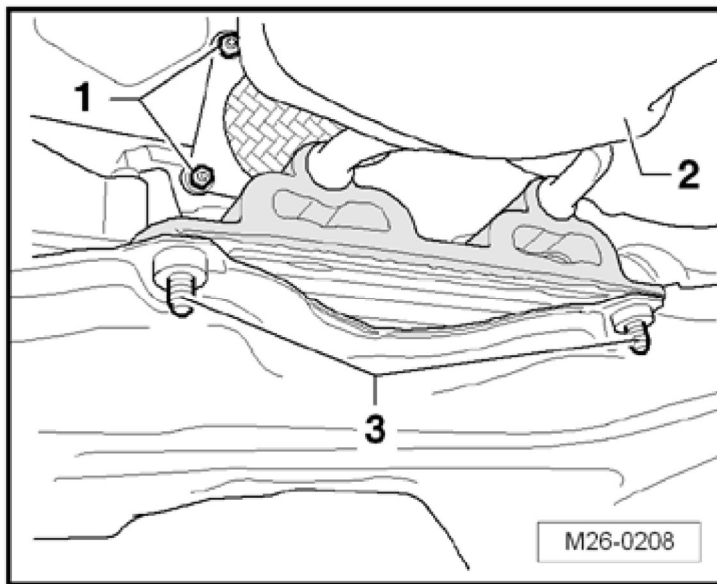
Pulling Off Front Exhaust Pipe From Double Clamp And From Manifold
